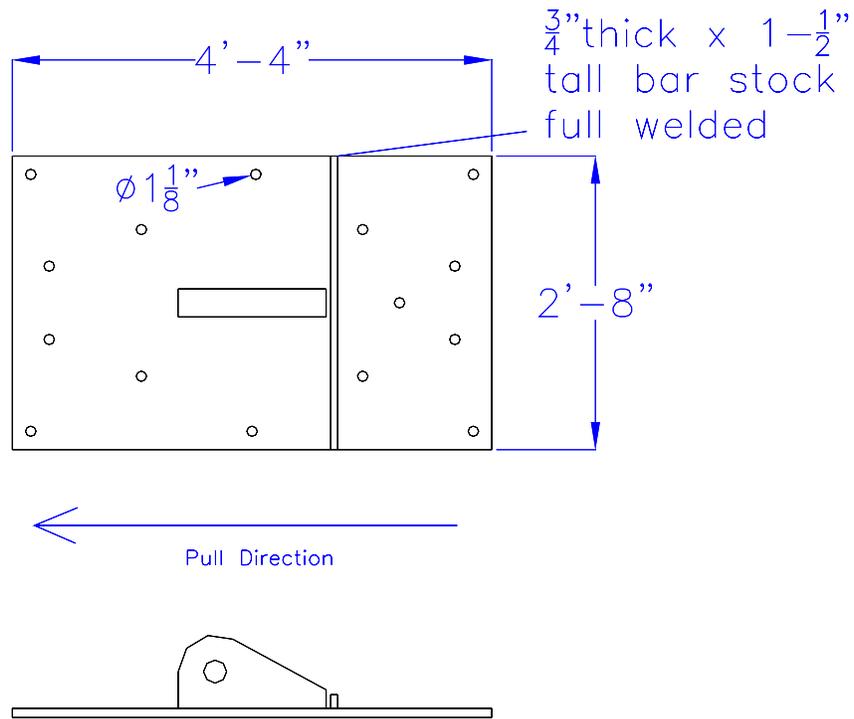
Expedient Anchor Plate Plan and Elevation Views (Steel Anchor Post and Pour Holes Not Shown)
